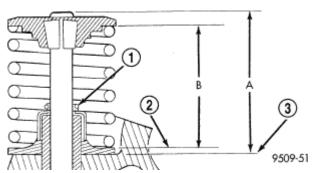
Checking Valve Spring Installed Height B Courtesy of CHRYSLER LLC
